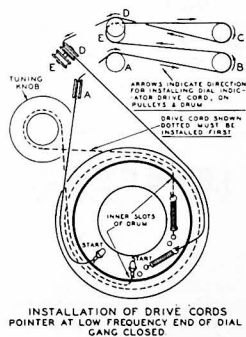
DIAL POINTER AND CABLE ARRANGEMENT
